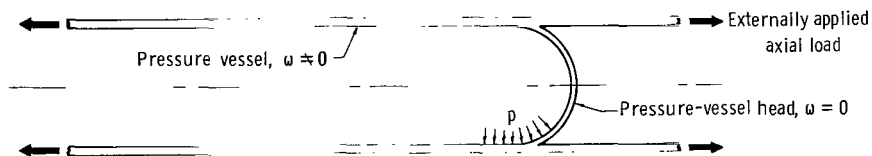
Pressure-vessel head attached to cylindrical pressure vessel which is carrying an externally applied axial load.
